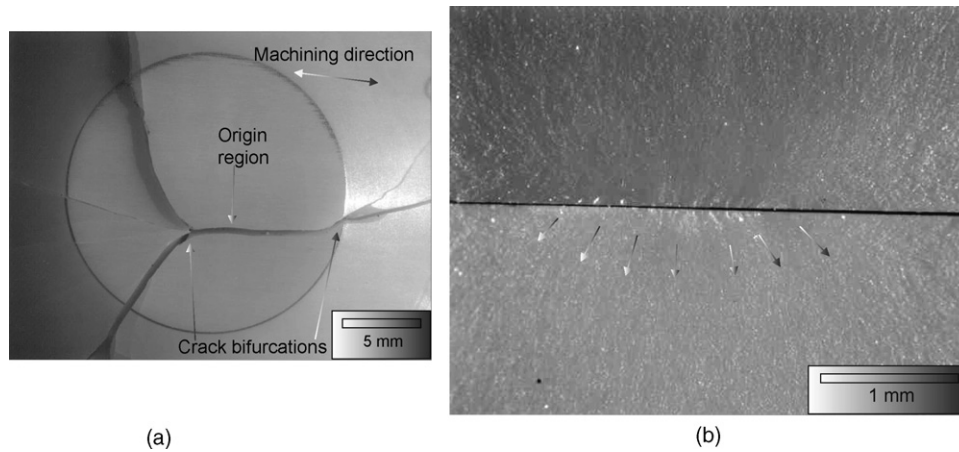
Ultimate burst test on developmental acetabular cup showing: (a) biaxial fracture pattern in the cup centre viewed from the outside, and (b) external face to face positioned fracture faces showing an extended fracture origin of the 'zipper flaw' type typical of grinding damage.
